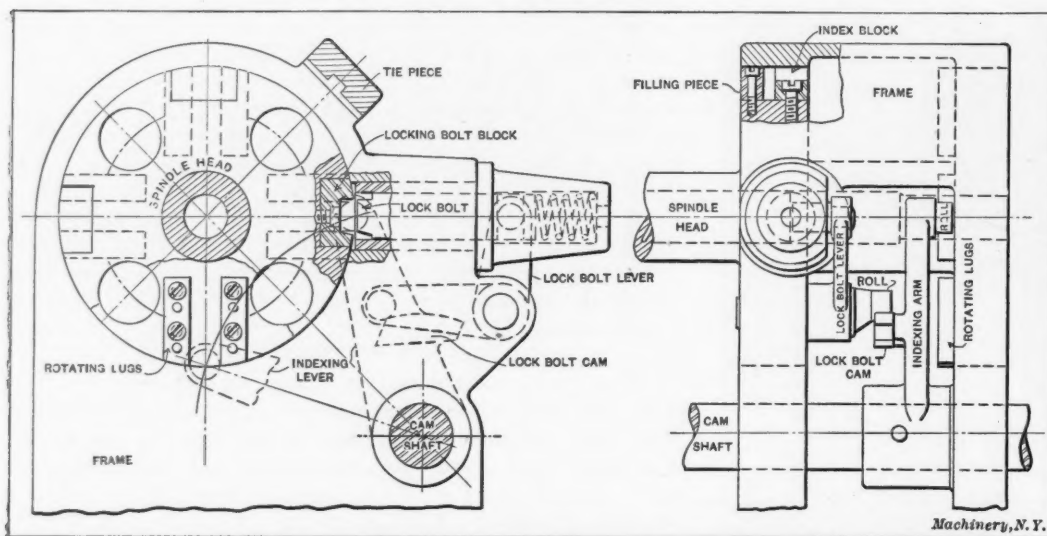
General Design of Spindle Head and Indexing and Locking Mechanism of the Gridley Automatic Turret Lathe
